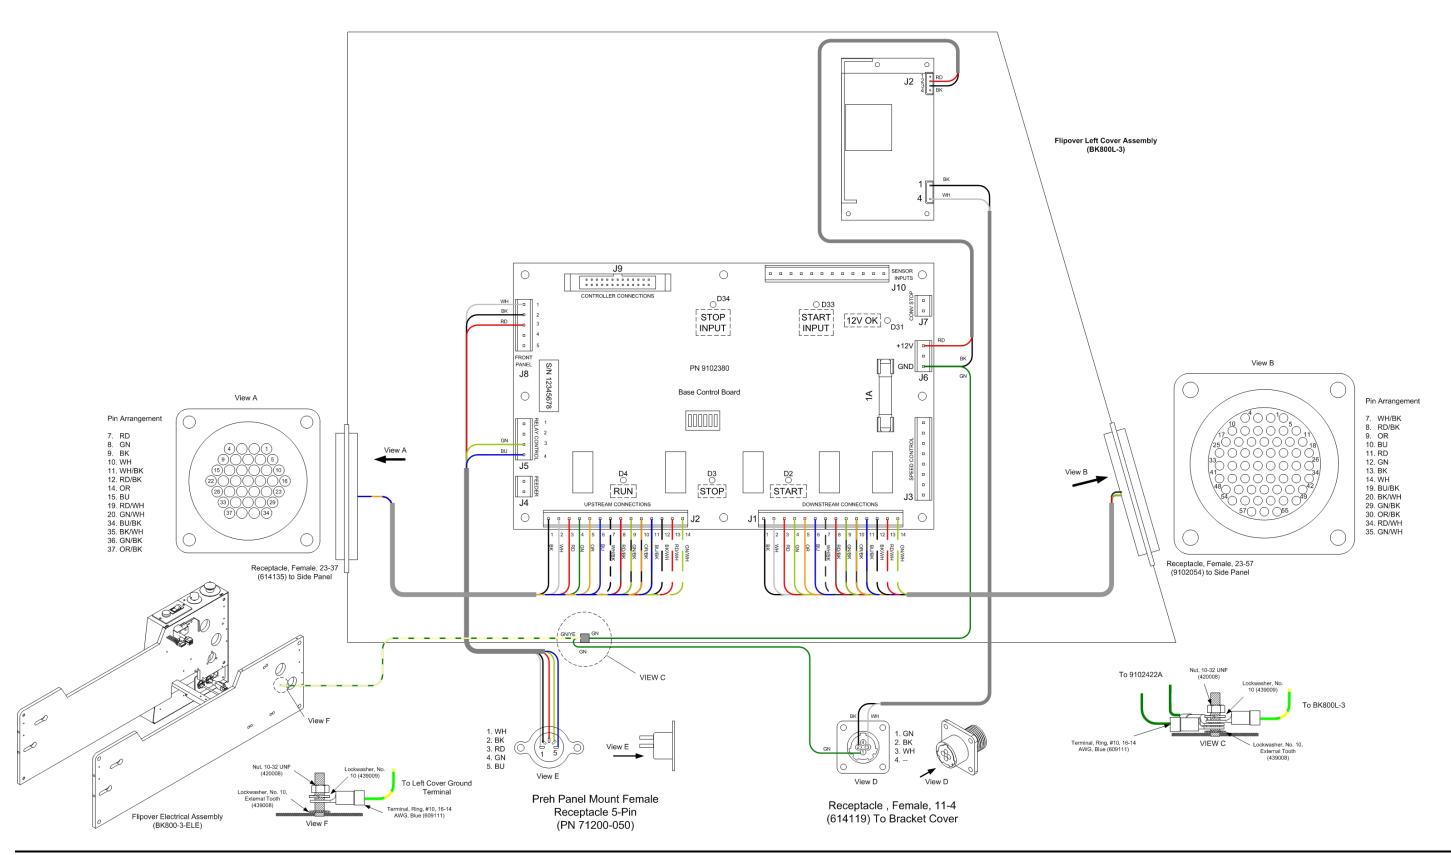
BK800L-3-ELE, Right Cover Assembly (9102946A)
